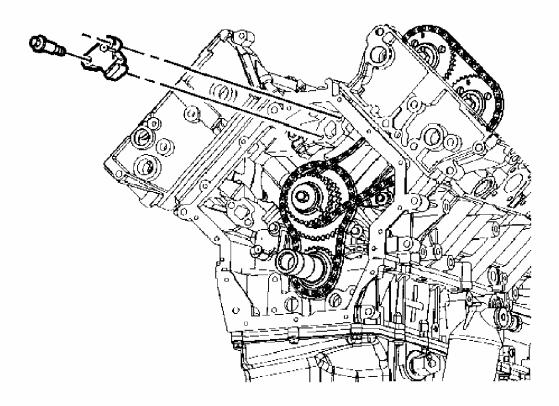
View Of Left Secondary Camshaft Drive Chain Tensioner & Bolts Courtesy of GENERAL MOTORS CORP.
